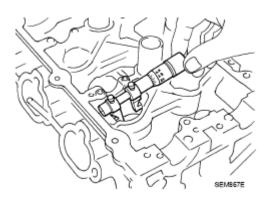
Measuring Inner Diameter Of Valve Lifter Hole Of Cylinder Head
